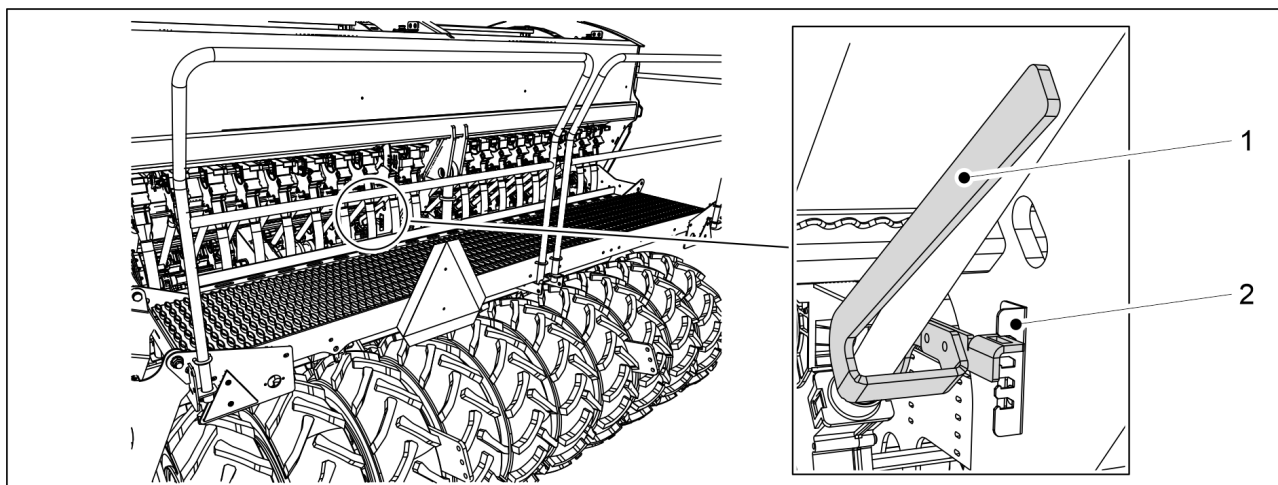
134. Control lever for the bottom flaps of the feeder units, seed hopper
